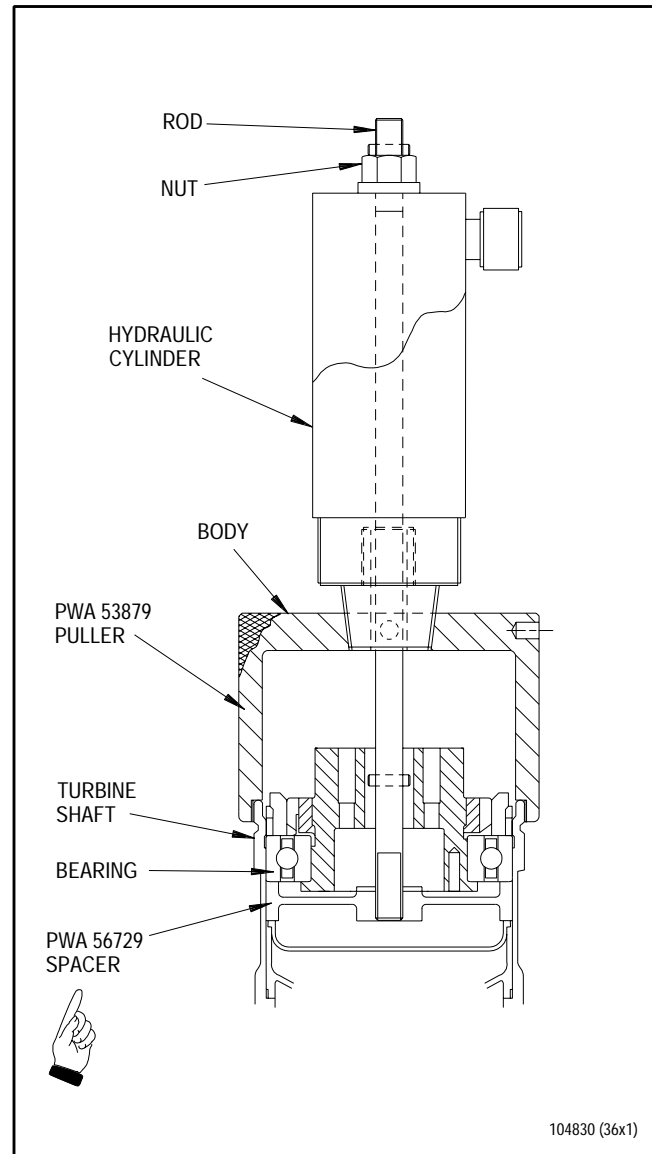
Front Compressor Drive Turbine Rotor and Stator Assembly - Balancing Tooling Removal (Sheet 6 of 6)
